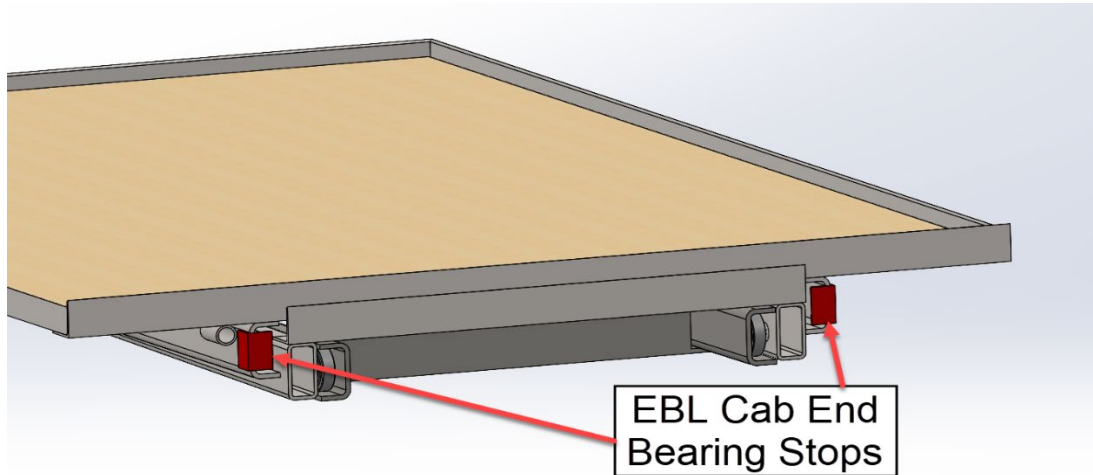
EBL Cab-End Bearing Stops Set (Outside)
